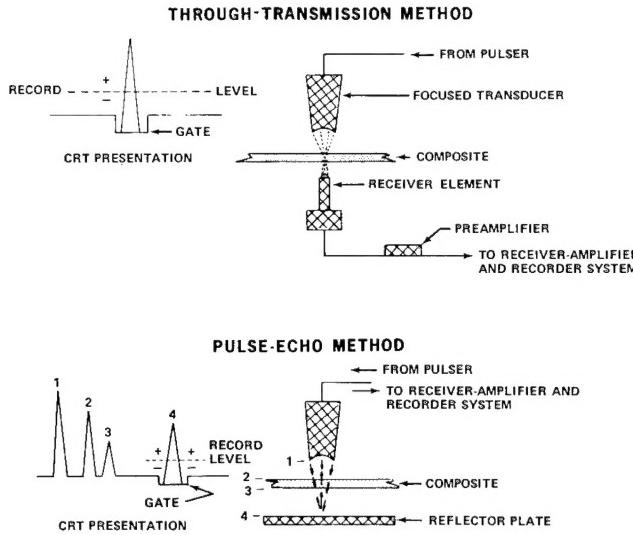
ULTRASONIC INSPECTION TECHNIQUES
